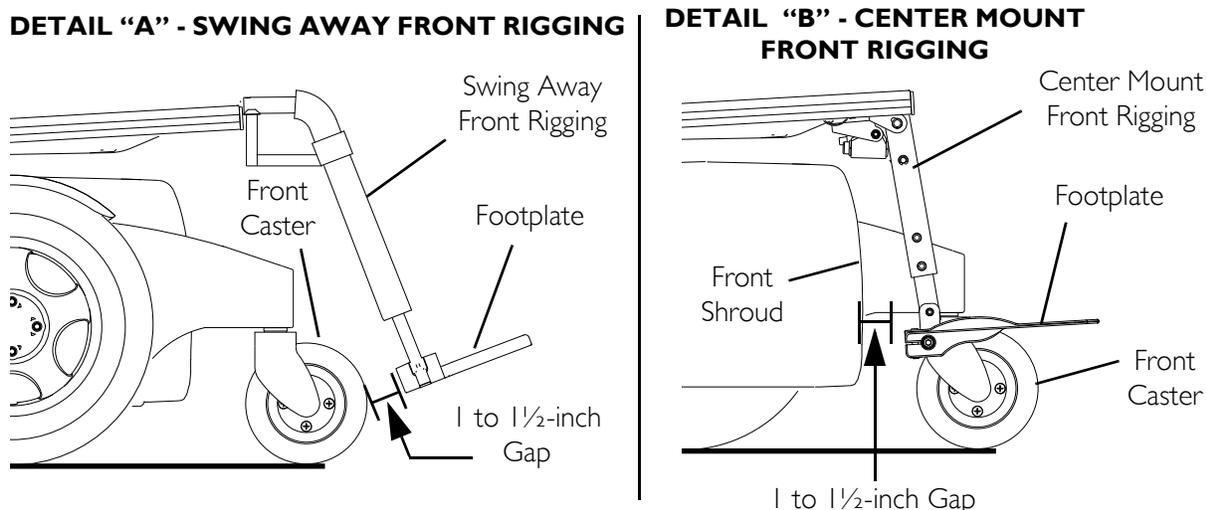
Checking the Clearance between the Front Rigging and Caster Wheel or Front Rigging and Front Shroud
